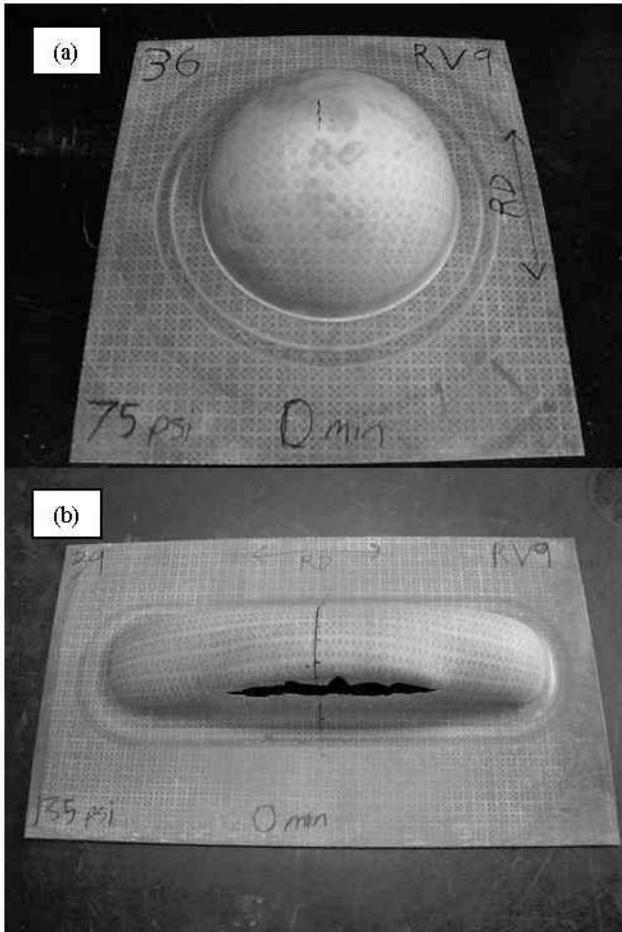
Example (a) biaxial and (b) plane-strain gas-pressure bulge specimens are shown.
